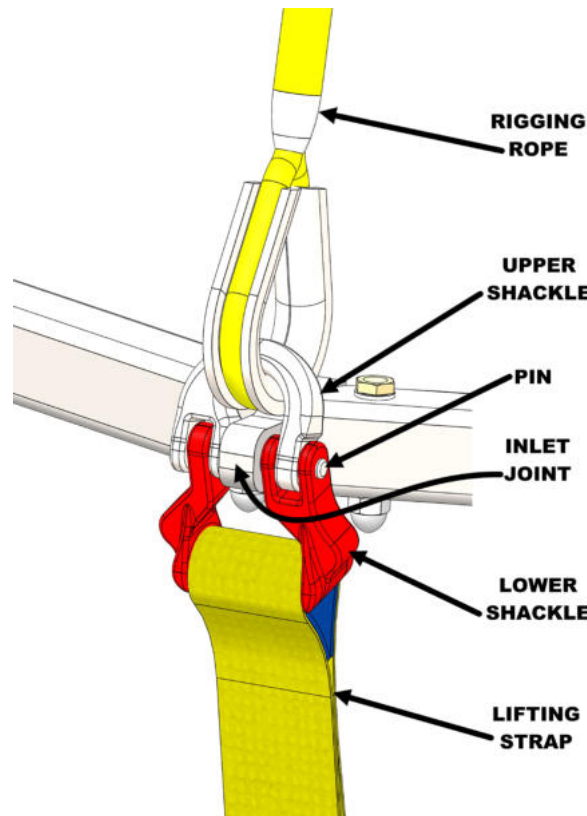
Sling Connector (Bucket Skin and Knuckle Covers hidden for clarity. Bushing not shown.)
